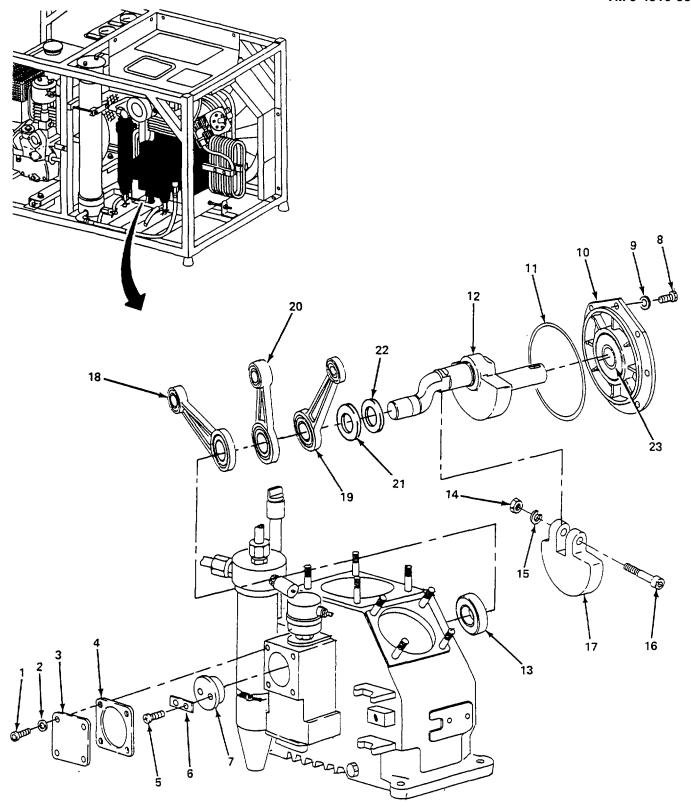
Compressor Crankshaft and Main Bearings, Replace.
